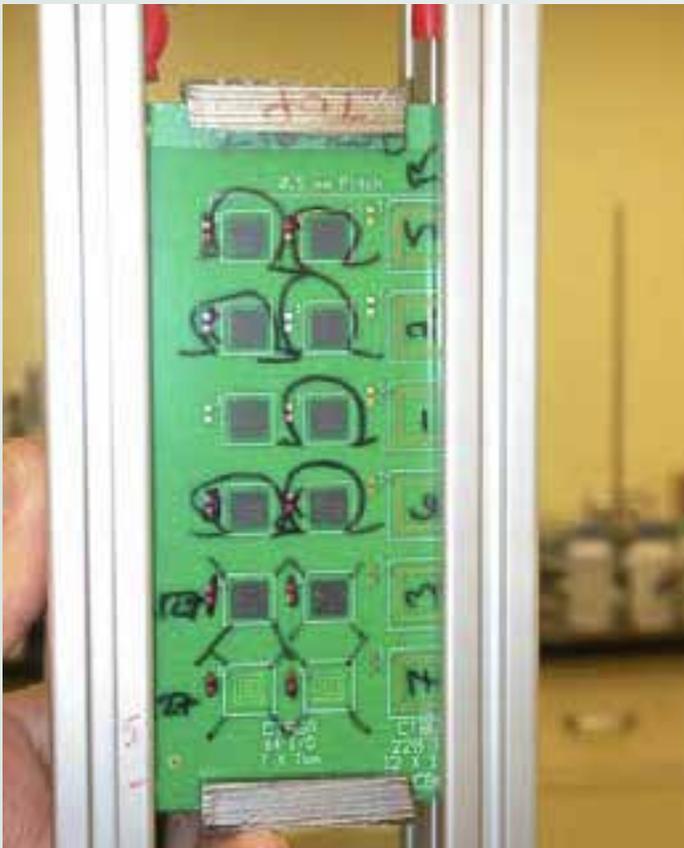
Test board positioned in the frame with steel weight mounted on both top and bottom ends of boards.
